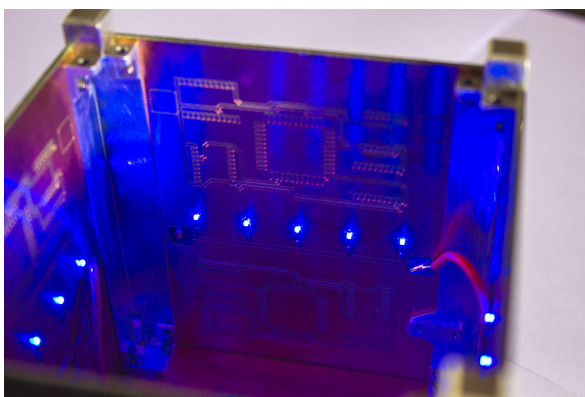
Close-up view of the machined circuitry on the internal surface of the CubeSat.
